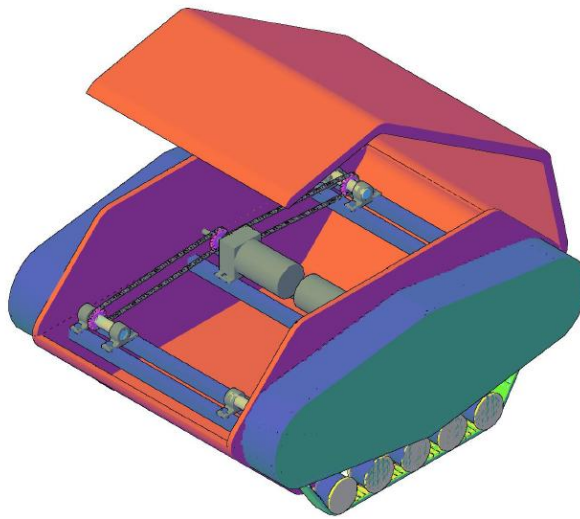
IMR Belt Robot – internal mechanism and chassis
